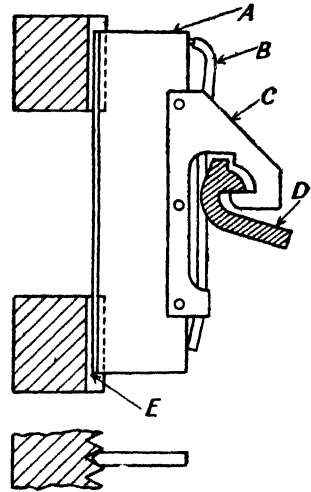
SECTIONAL VIEW OF MAIN-LINE CONTACT BLADES OF A LINE CONTACT AIR CIRCUIT-BREAKER
